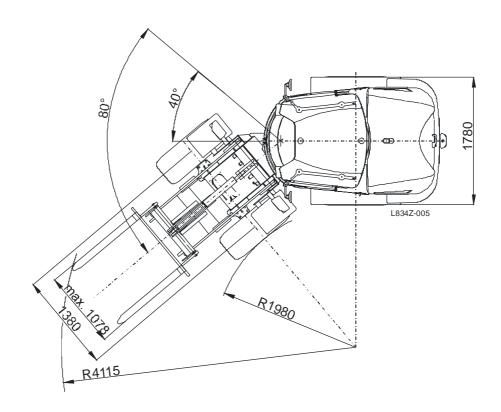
Dimensioned drawing with fork lift attachment and Z-bar linkage 405/70 R 18 tires
